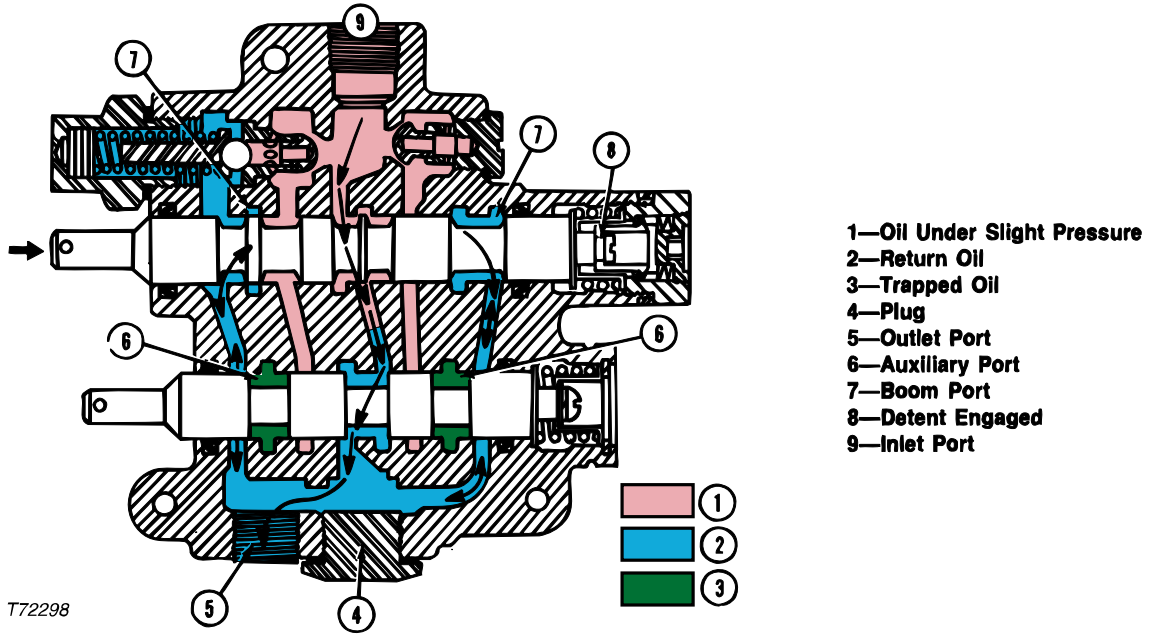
Control Valve in Float Position (2-spool valve shown)
